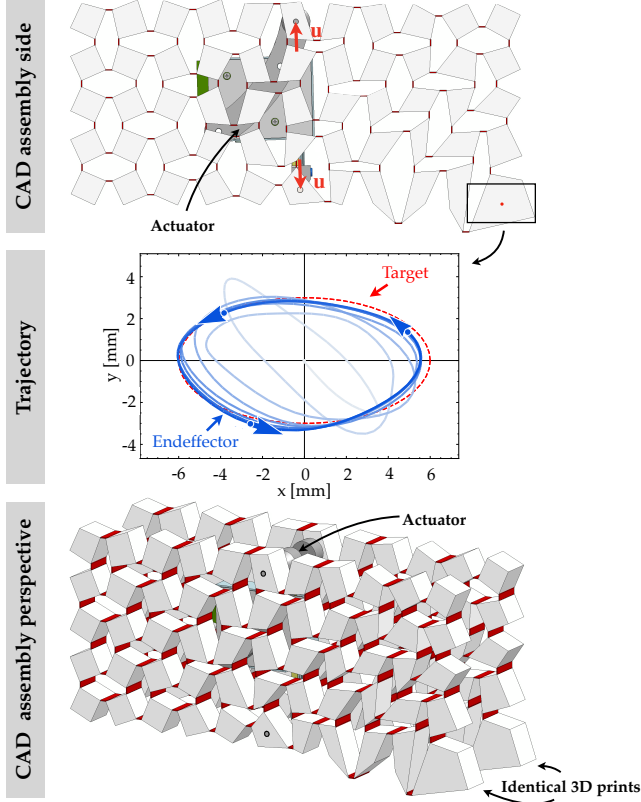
Assembled CAD prototype and optimized trajectory: CAD assembly of robotic metamaterial prototype with the mounted actuator in side view, the generated endeffector trajectory, and the assembly in perspective
